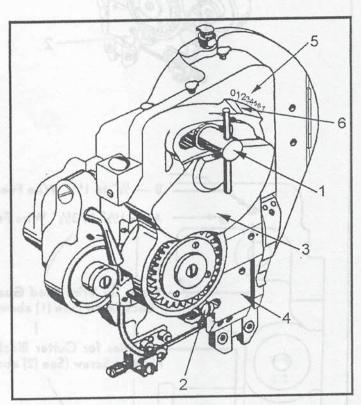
Wire Draw Adjustments and Wire Draw Scale
